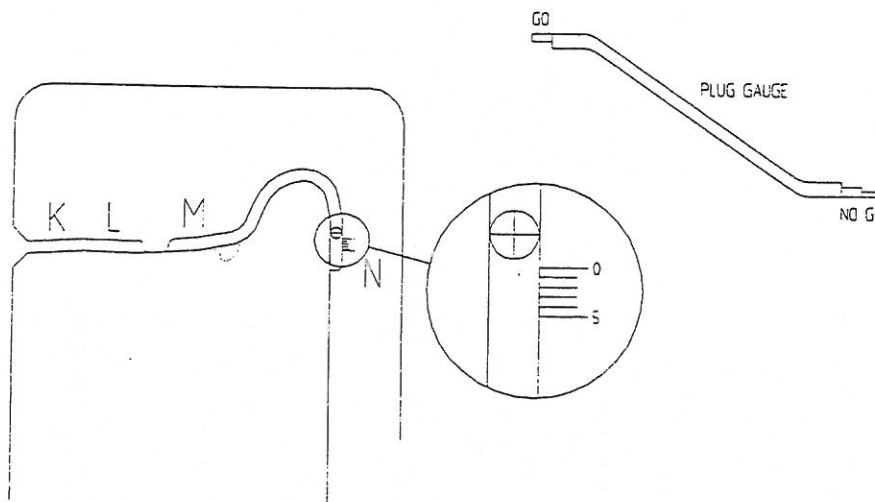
PROFILE LIMIT MACHINING GAUGE & PLUG GAUGE
